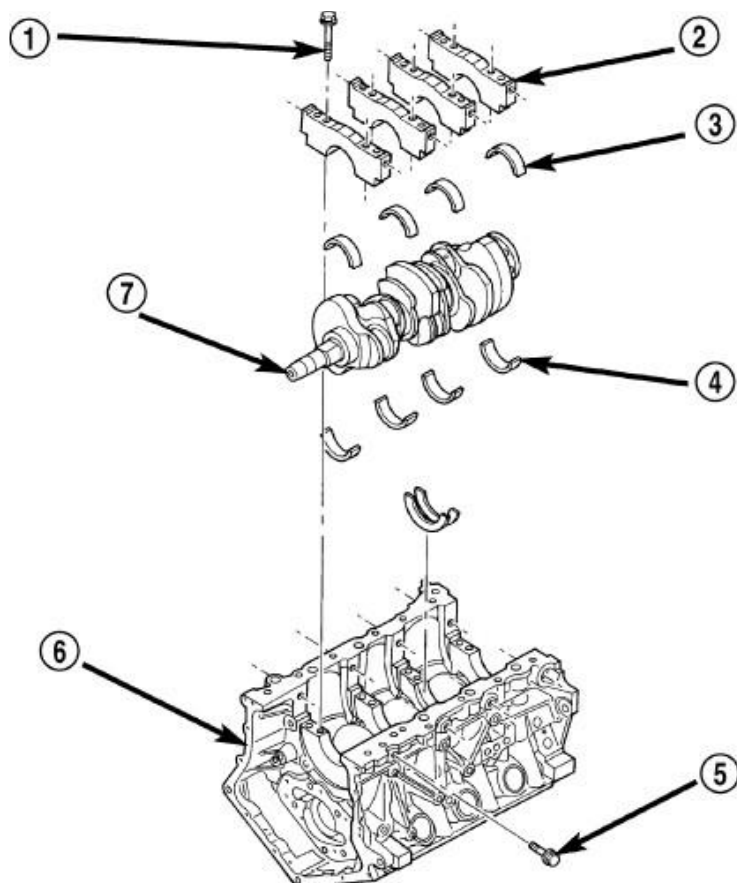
ENGINE BLOCK AND CRANKSHAFT
